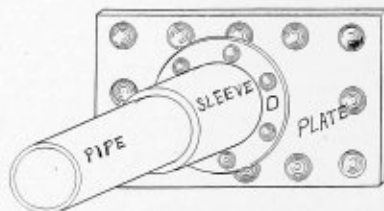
COVERING A DEFECTIVE ARRANGEMENT OF PIPING.
